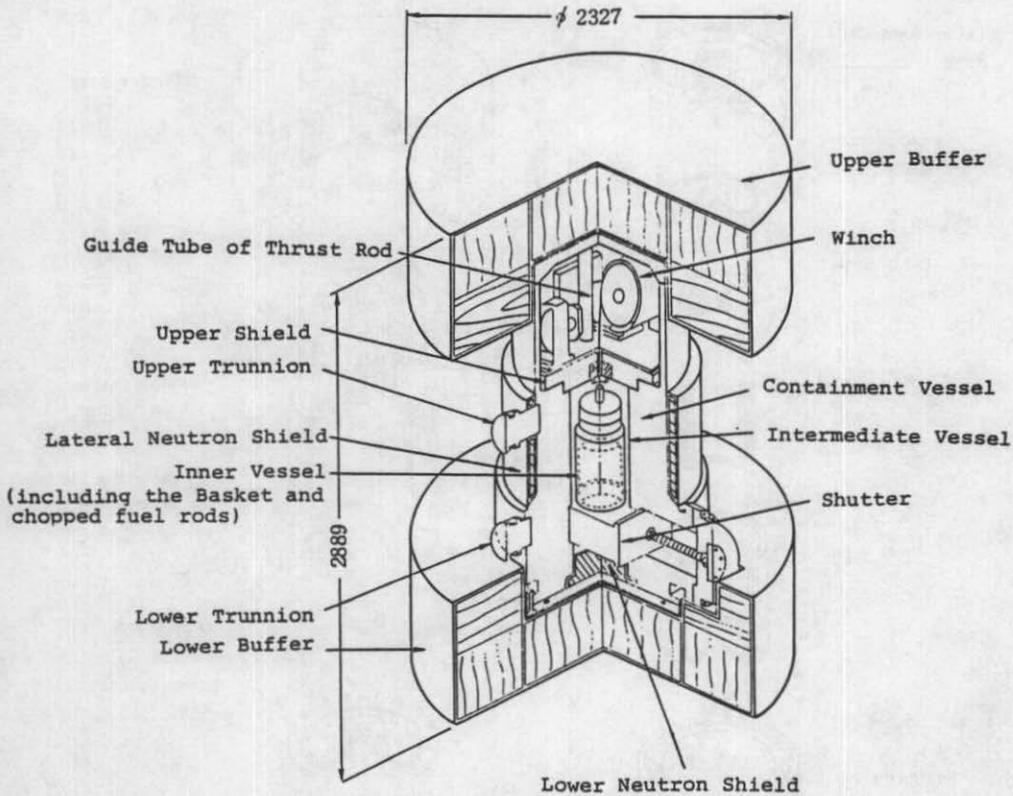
Cutaway of the P-3S(12T) cask (dimensions in mm).
